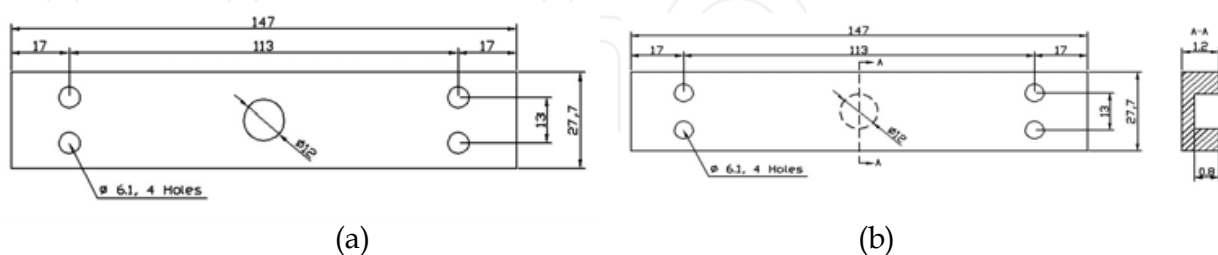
Dimensions of specimens used in-plane displacement (unit : mm) (a) rectangular steel plate with through-thickness circular hole (b) rectangular steel plate with partly through-thickness circular hole.
